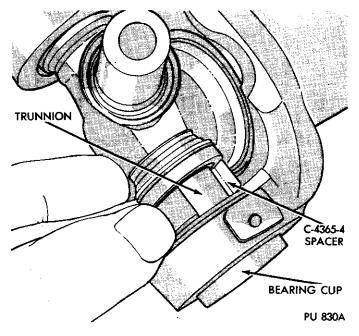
Bearing Cap Removal With Tool C-4365-4
